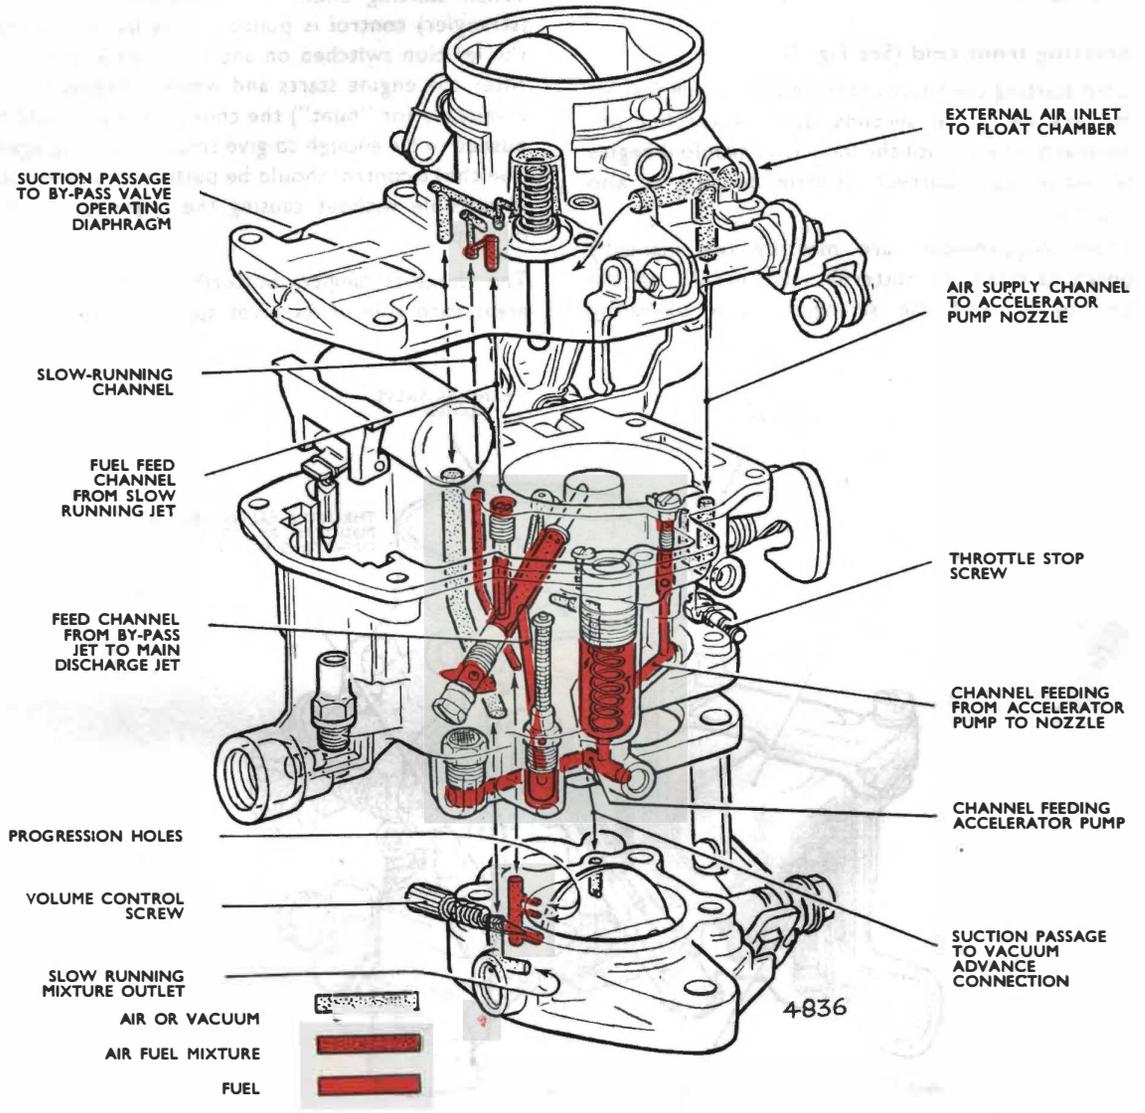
Zenith WIA 36 carburettor. Arrangement of channels
